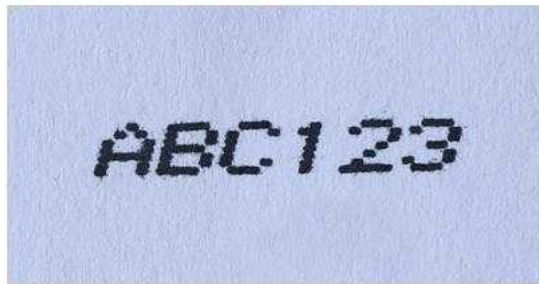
Excessively Dark / Heavy Print: Ink dots are oversized and bleed together, commonly caused by low ink viscosity or excessive boldness settings.
